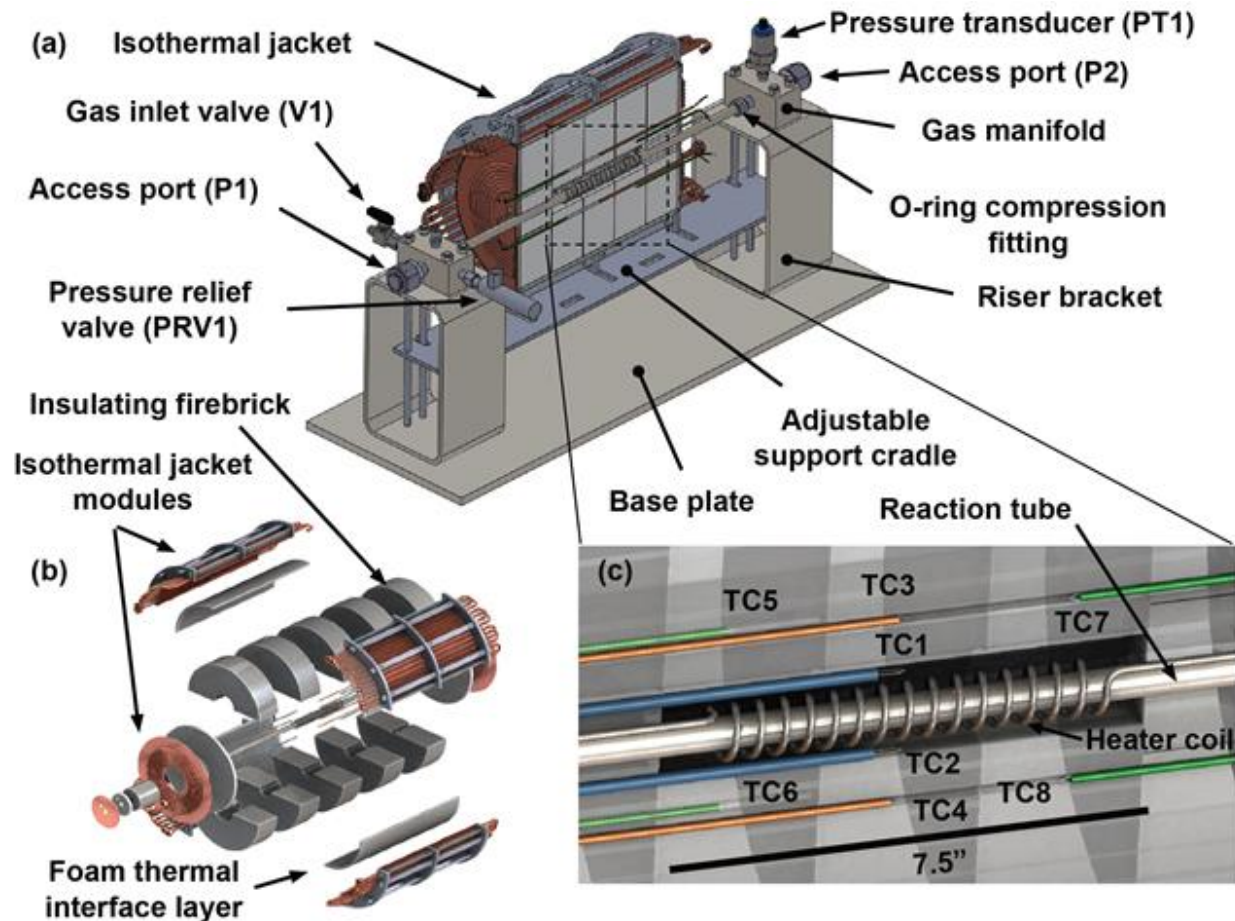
Mechanical design of the calorimeter. (a) Overview of the instrument with one half of the isothermal jacket and furnace insulation cut away. (b) Exploded view of the furnace, showing the ten insulating fire bricks and the surrounding modular isothermal jacket consisting of four quadrants, two end plates and corresponding elastic foam thermal interface layers (c) Detail view of the hot zone showing the locations of the heater and the eight internal thermocouples (orange, green and blue cylinders, TC1 - TC8). Not shown are six additional thermocouples epoxied to the isothermal jacket (TC9 - TC14), one on each quadrant and each endplate. (Reproduced from MacLeod *et al.*, *Review of Scientific Instruments* 88, 084101 (2017), with the permission of AIP Publishing)
